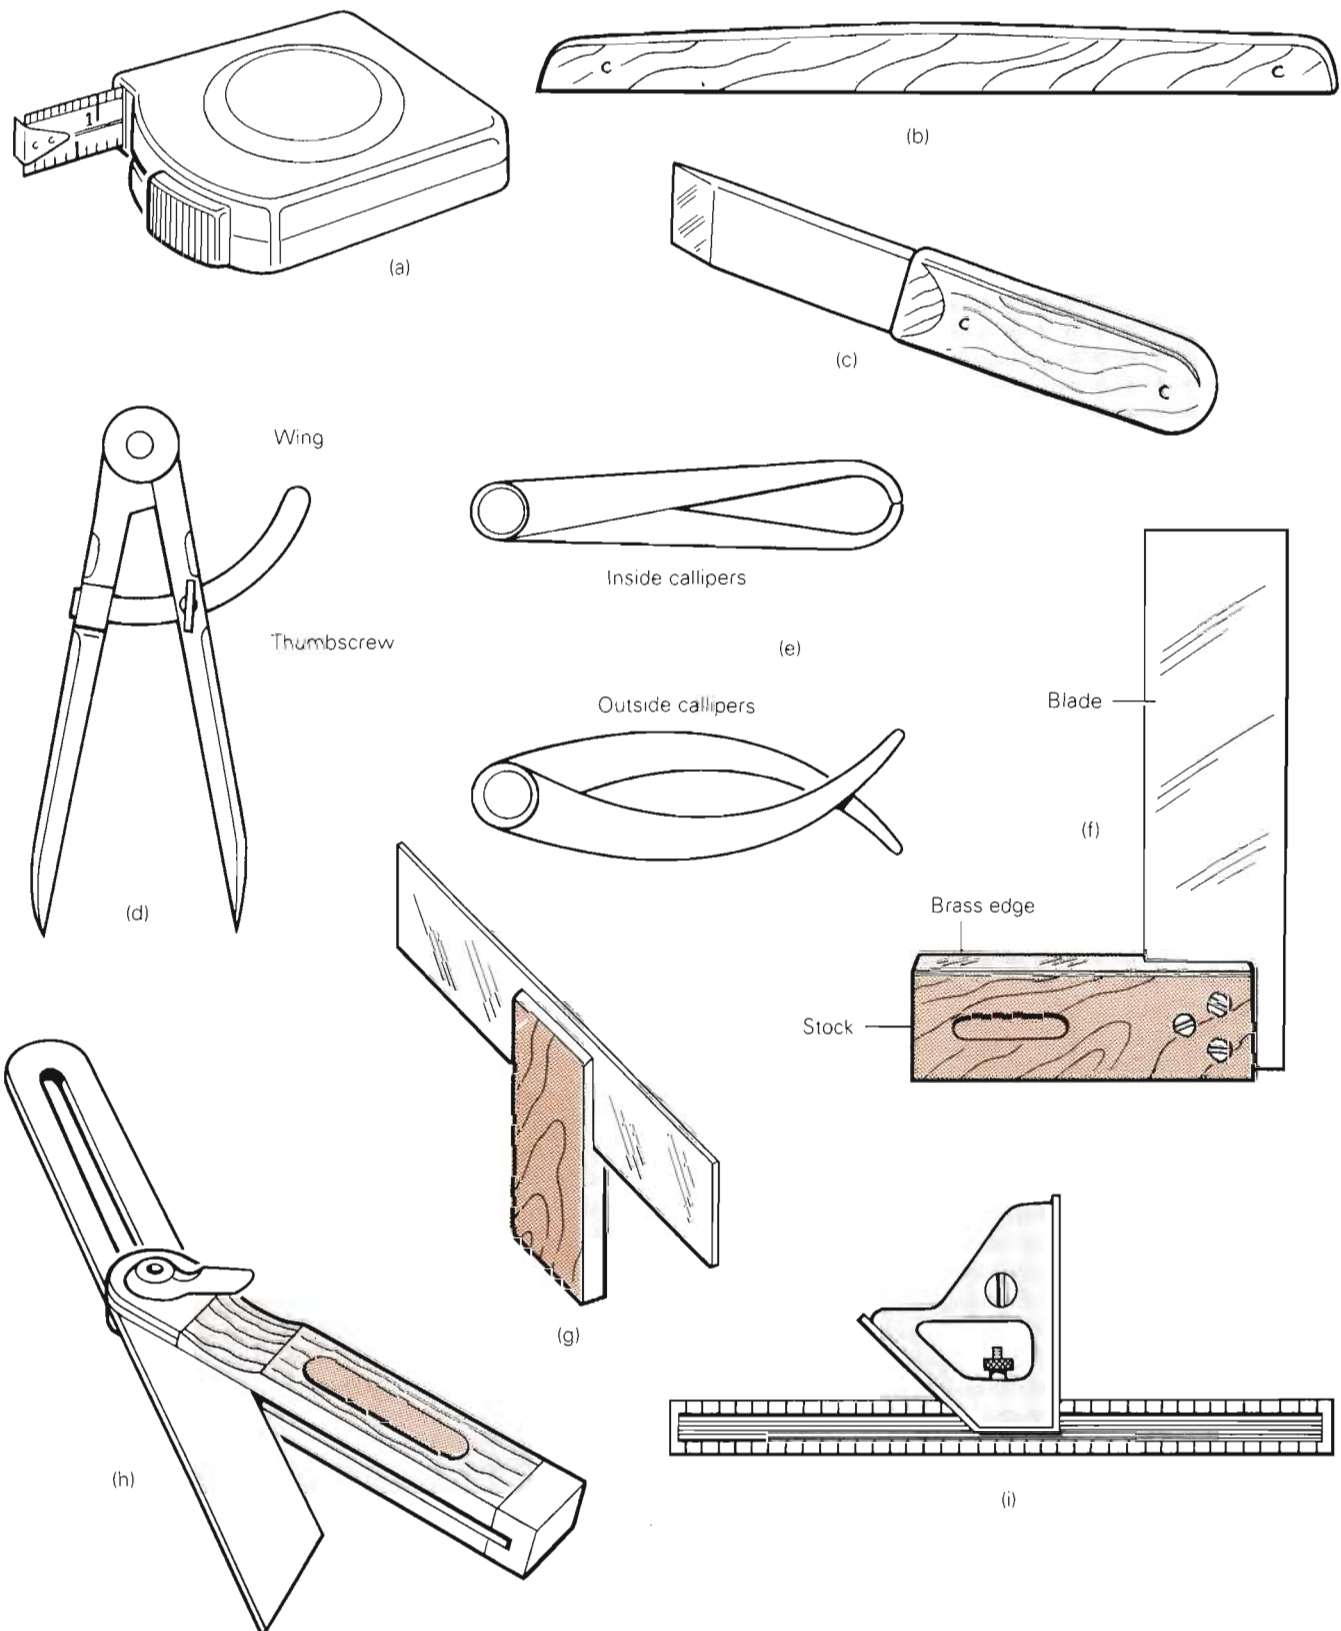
Geometrical tools: (a) rule, (b) straight edge, (c) marking knife, (d) wing compass, (e) callipers, (f) try-square, (g) mitre square, (h) sliding bevel, (i) combination square.
